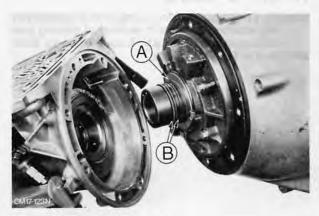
Install converter casing A - Thrust washer No. 1 B - Piston rings
